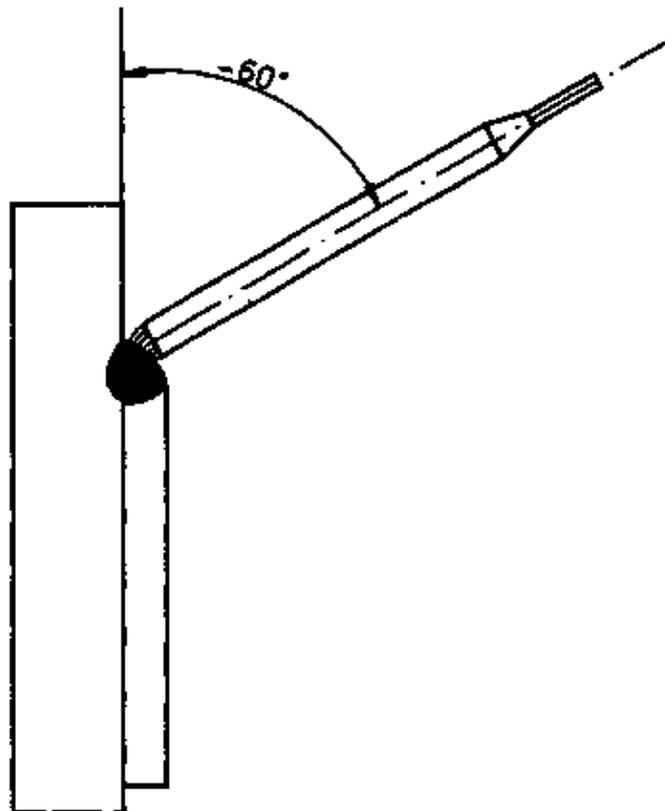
Electrode position for edge fillet welding in the horizontal position
